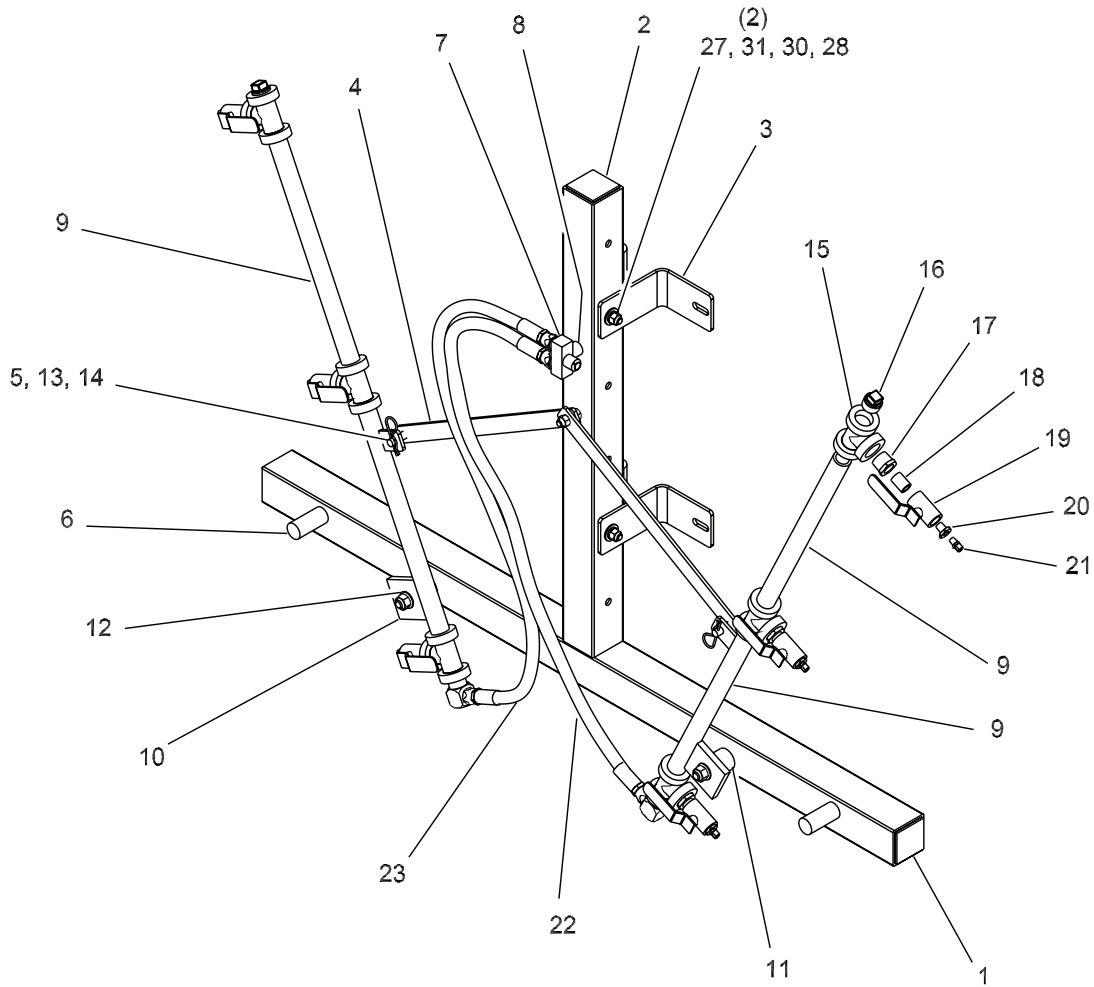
OPTIONAL SPRAY BAR ASSEMBLY, 8 FT
